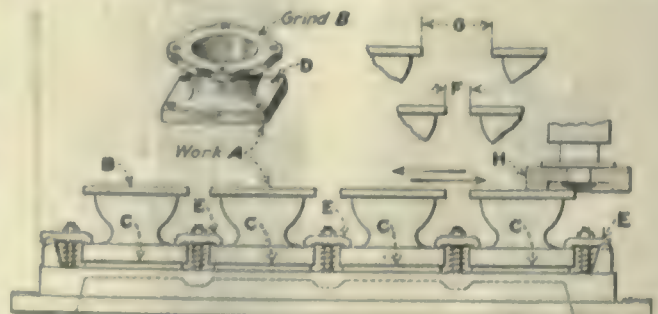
FIXTURE FOR HORIZONTAL SURFACE GRINDING
